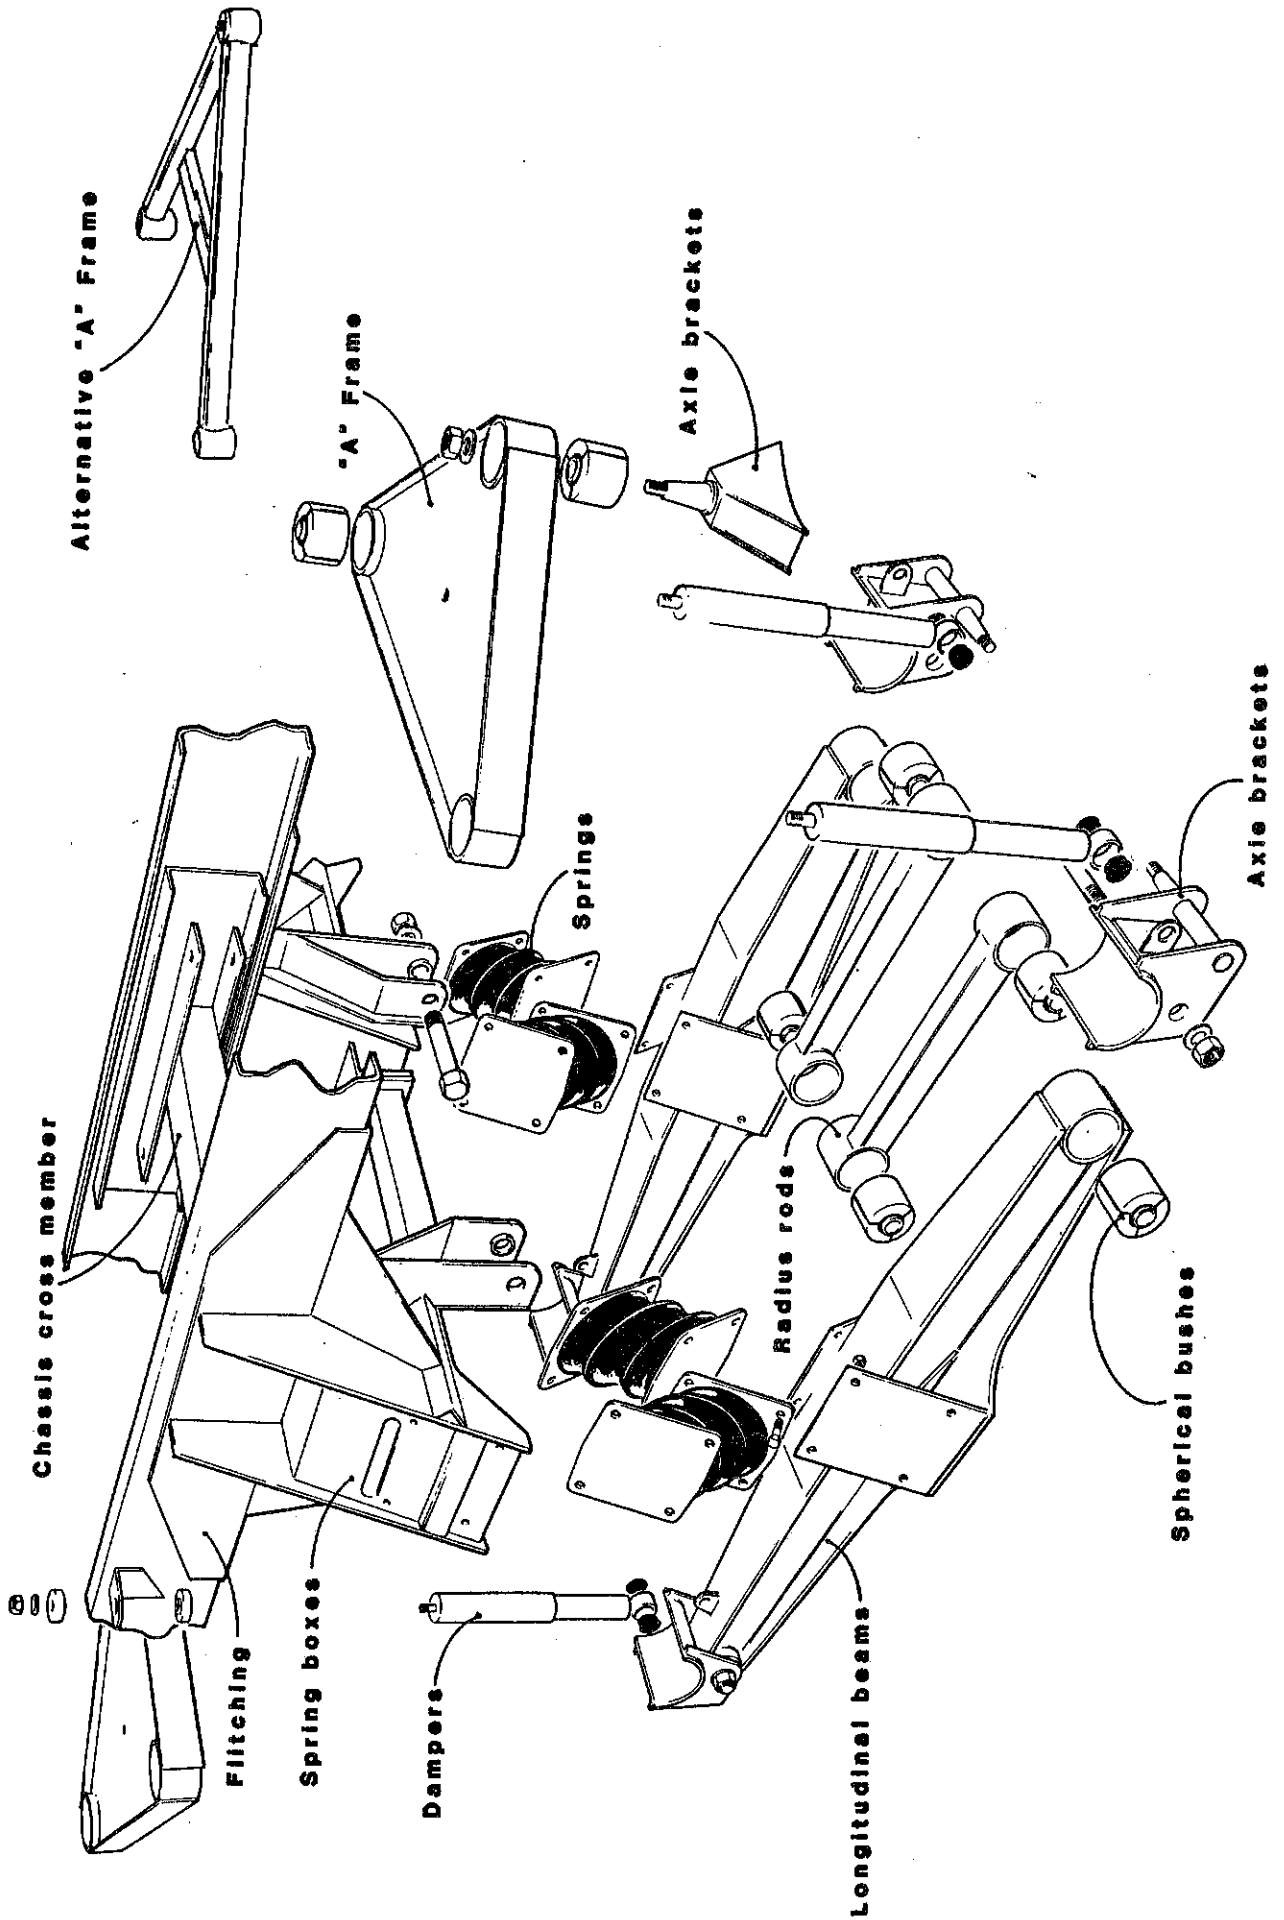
EXPLODED VIEW 20 TONNE UNIT
